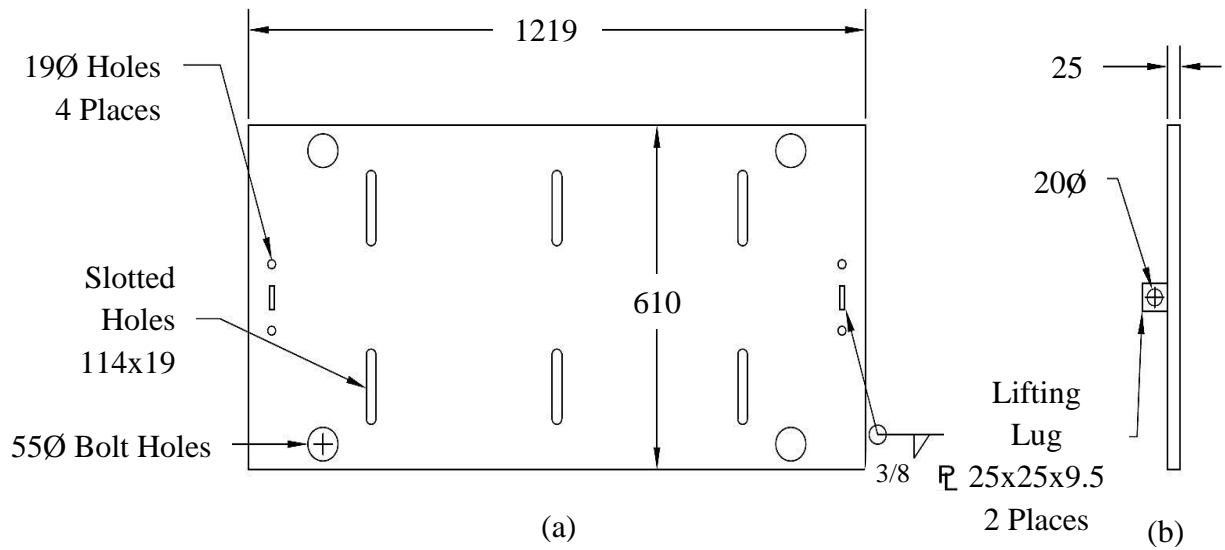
Bottom Ideal Support Steel Plate: (a) Top View, and (b) Side View (Dimensions in mm)
